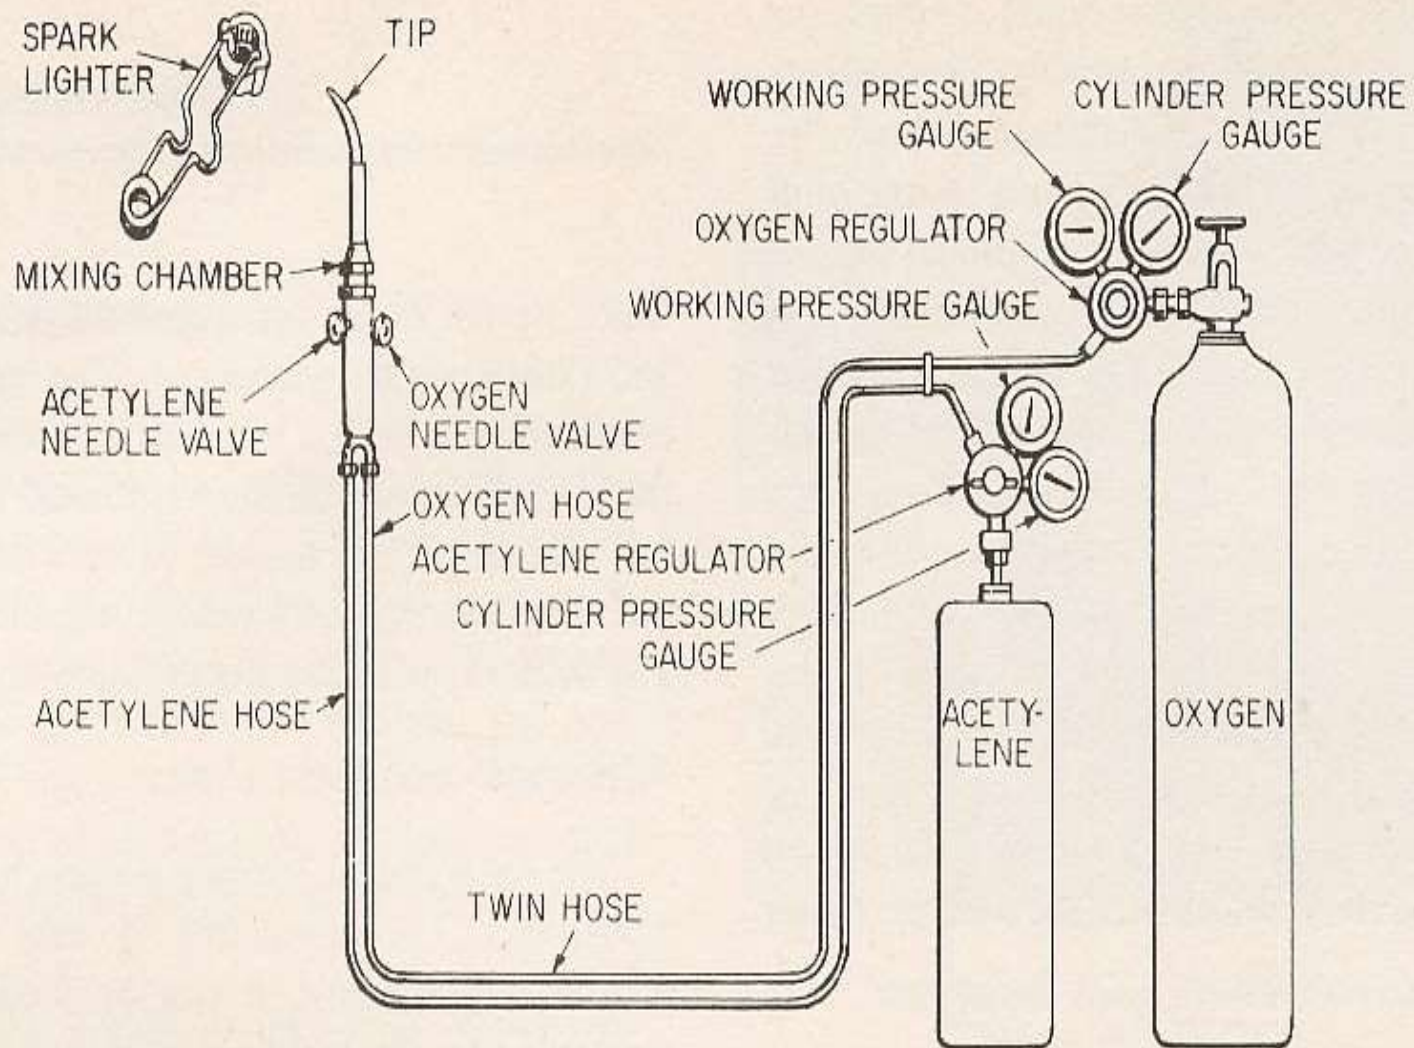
The apparatus required for welding with OAW.
